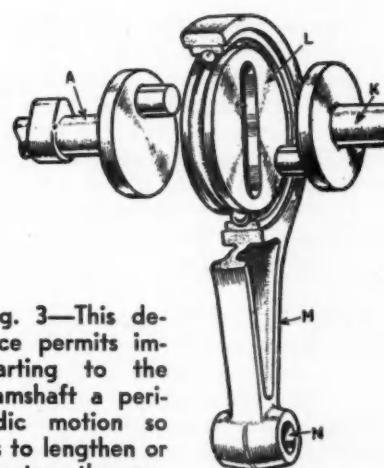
This device permits imparting to the camshaft a periodic motion so as to lengthen or shorten the period of valve opening
